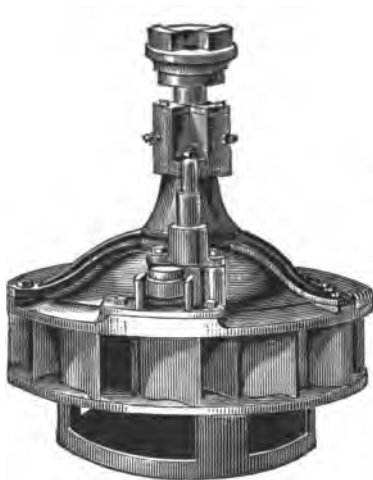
TURBINE-WHEEL IN ITS INNER CASE.
